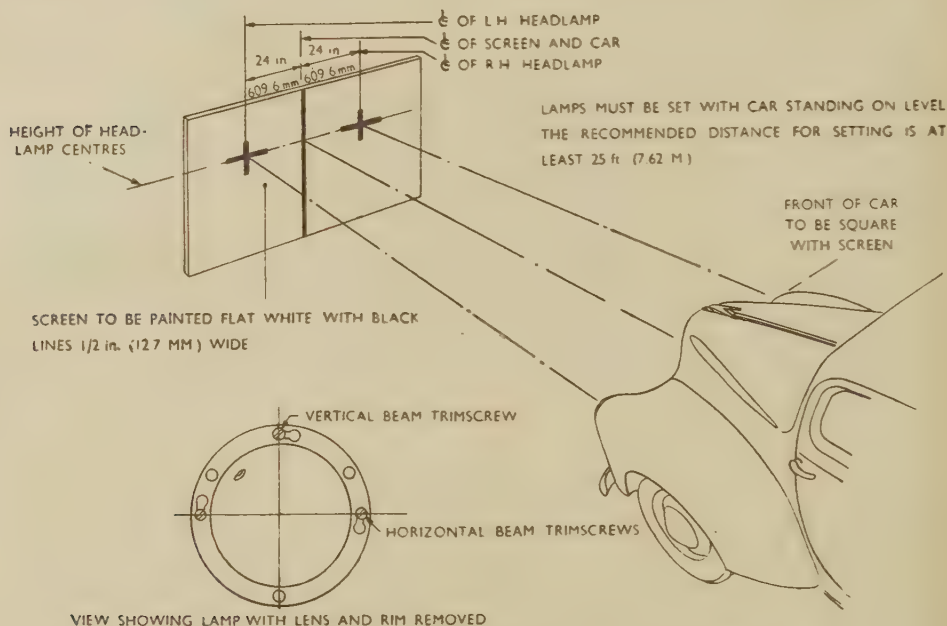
Method of Adjusting and Aligning the Vauxhall Headlamps.
